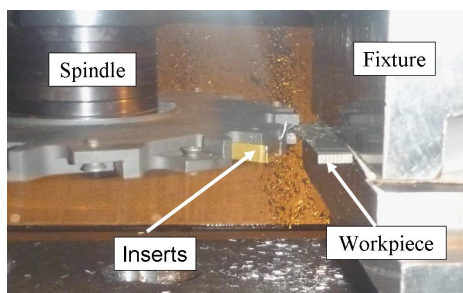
Workpiece and cutting inserts employed in the cutting tests
